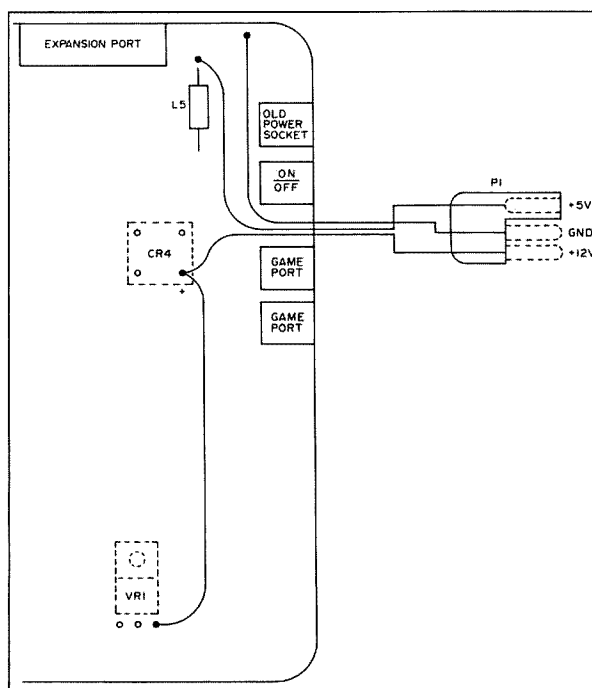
Rewiring the C-64 for DC conversion requires only three wires.
